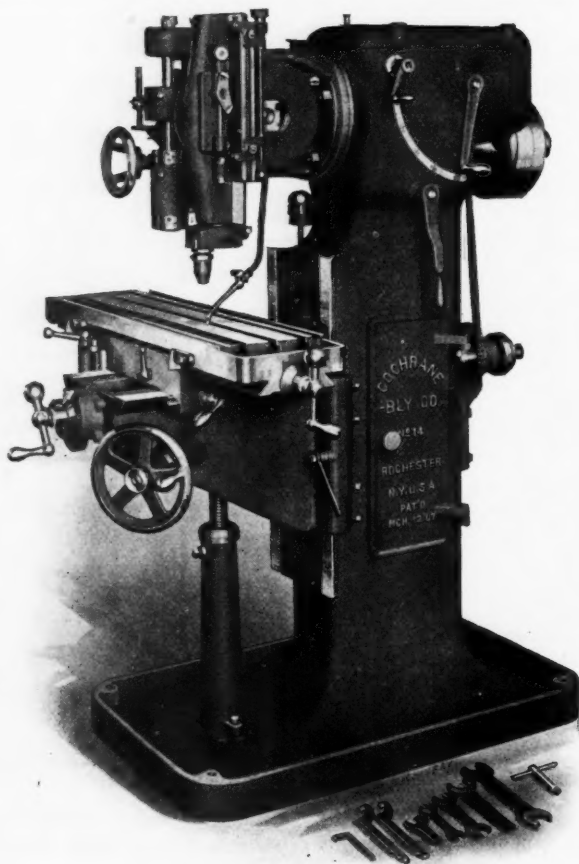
Combined Universal Shaper and Milling Machine for Die, Jig and General Tool Work
